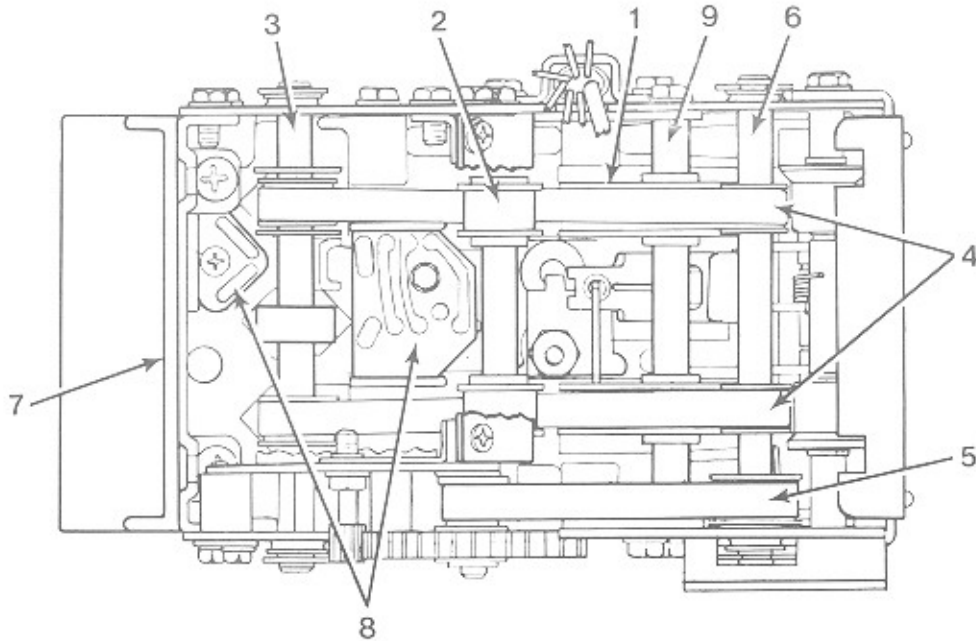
OBA-2 Transport Assembly, Sheet 2
